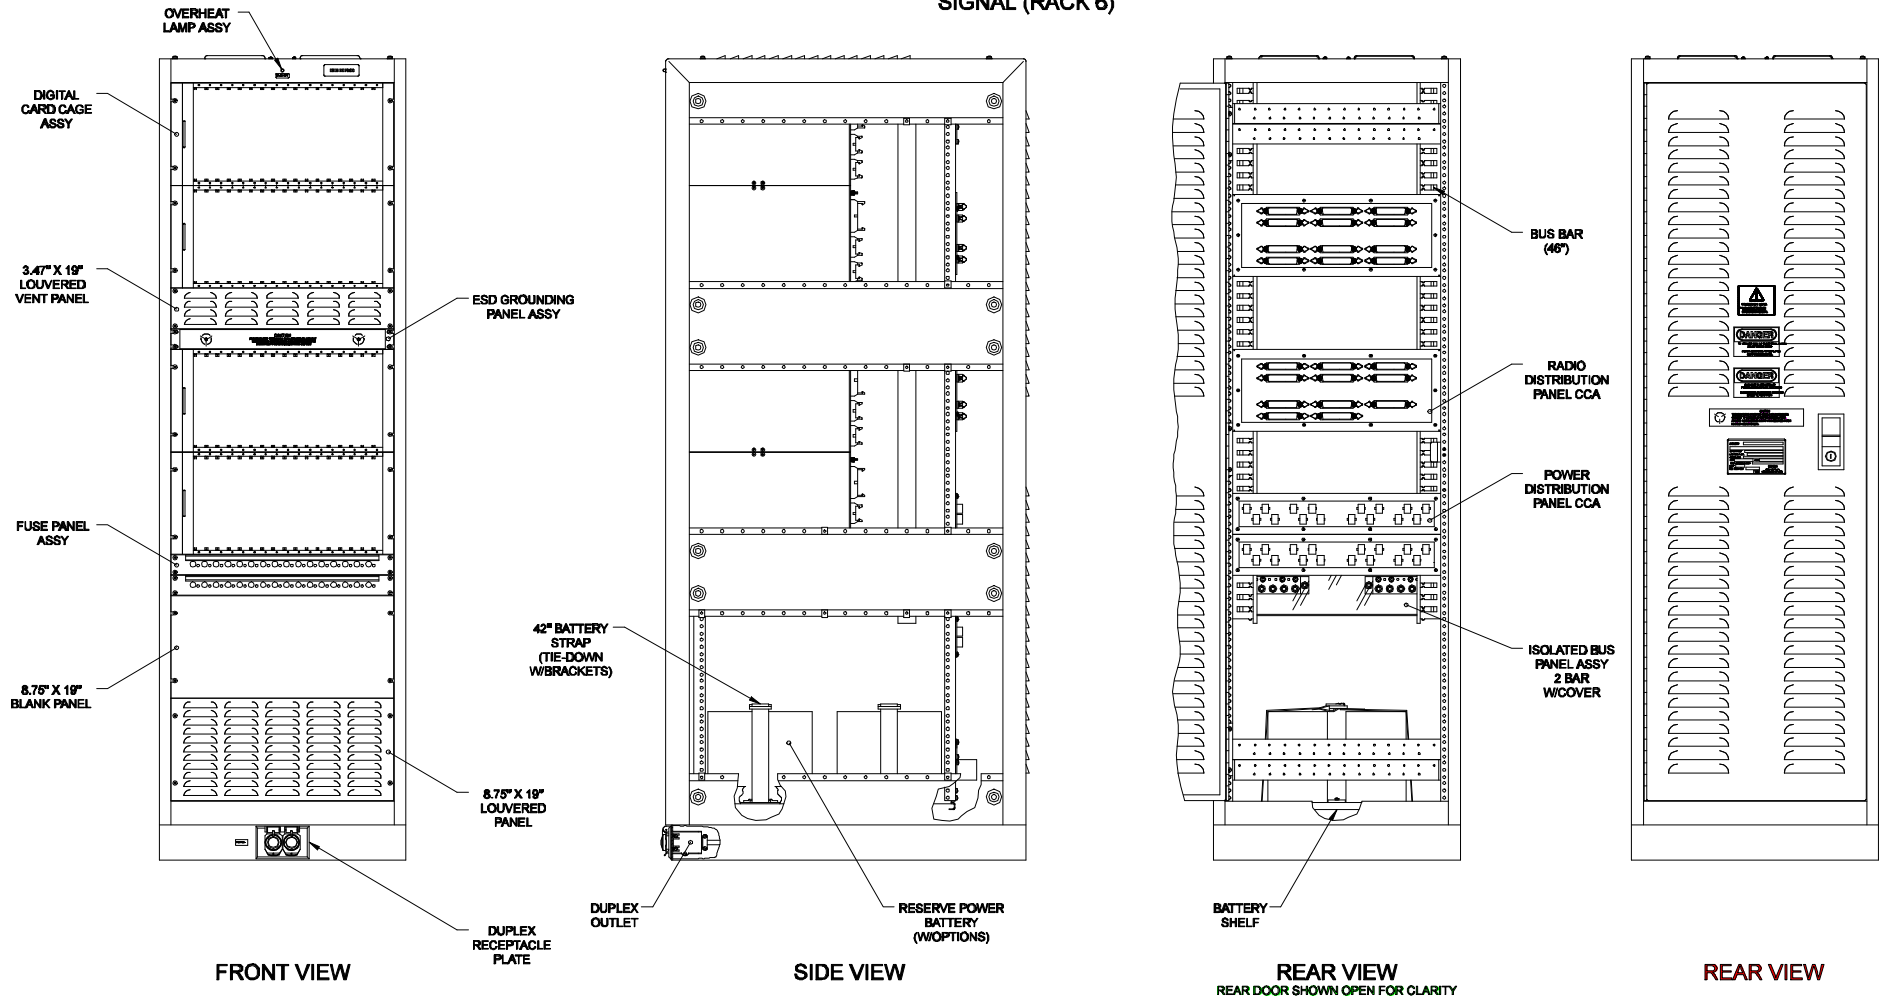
Basic ETVS System 4 (BS-4); Racks 1-7; Front, Side, and Rear Views (Sheet 6 of 7)
